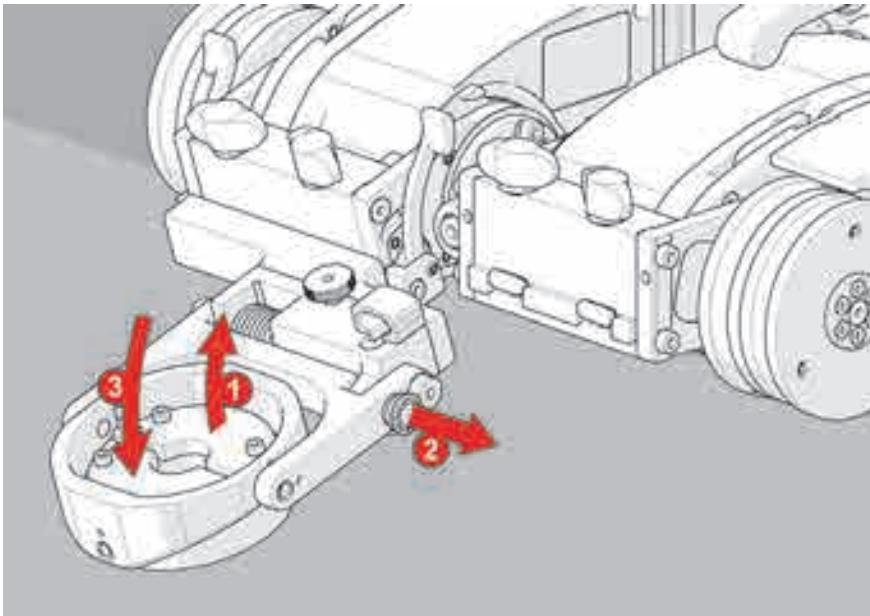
Pull probe latch to release dual conventional UT probe holder
